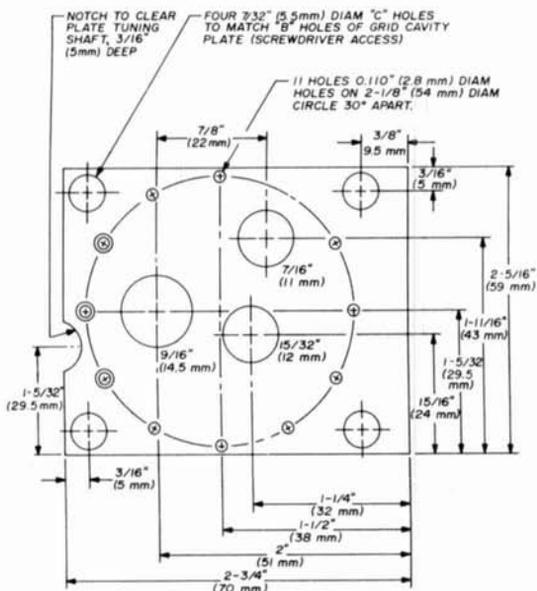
Cathode partition. Holes marked with the letter C are screwdriver clearance holes to facilitate assembly. Material is 0.093" (2.5mm) brass.
